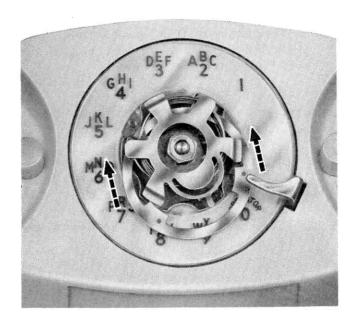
Lock Ring in Extreme Forward Position for Removal
